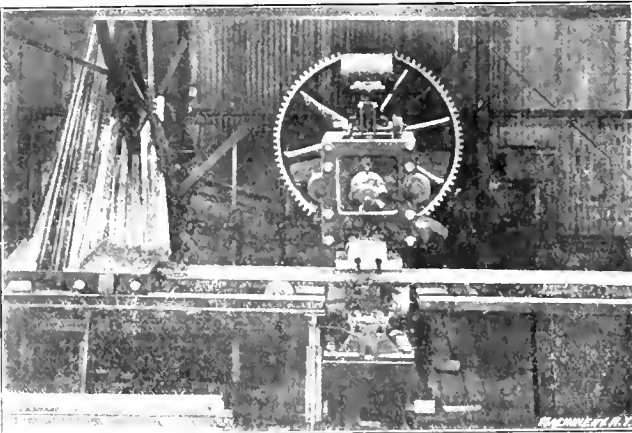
Punch Press and Device used to space Holes in Angle Irons
